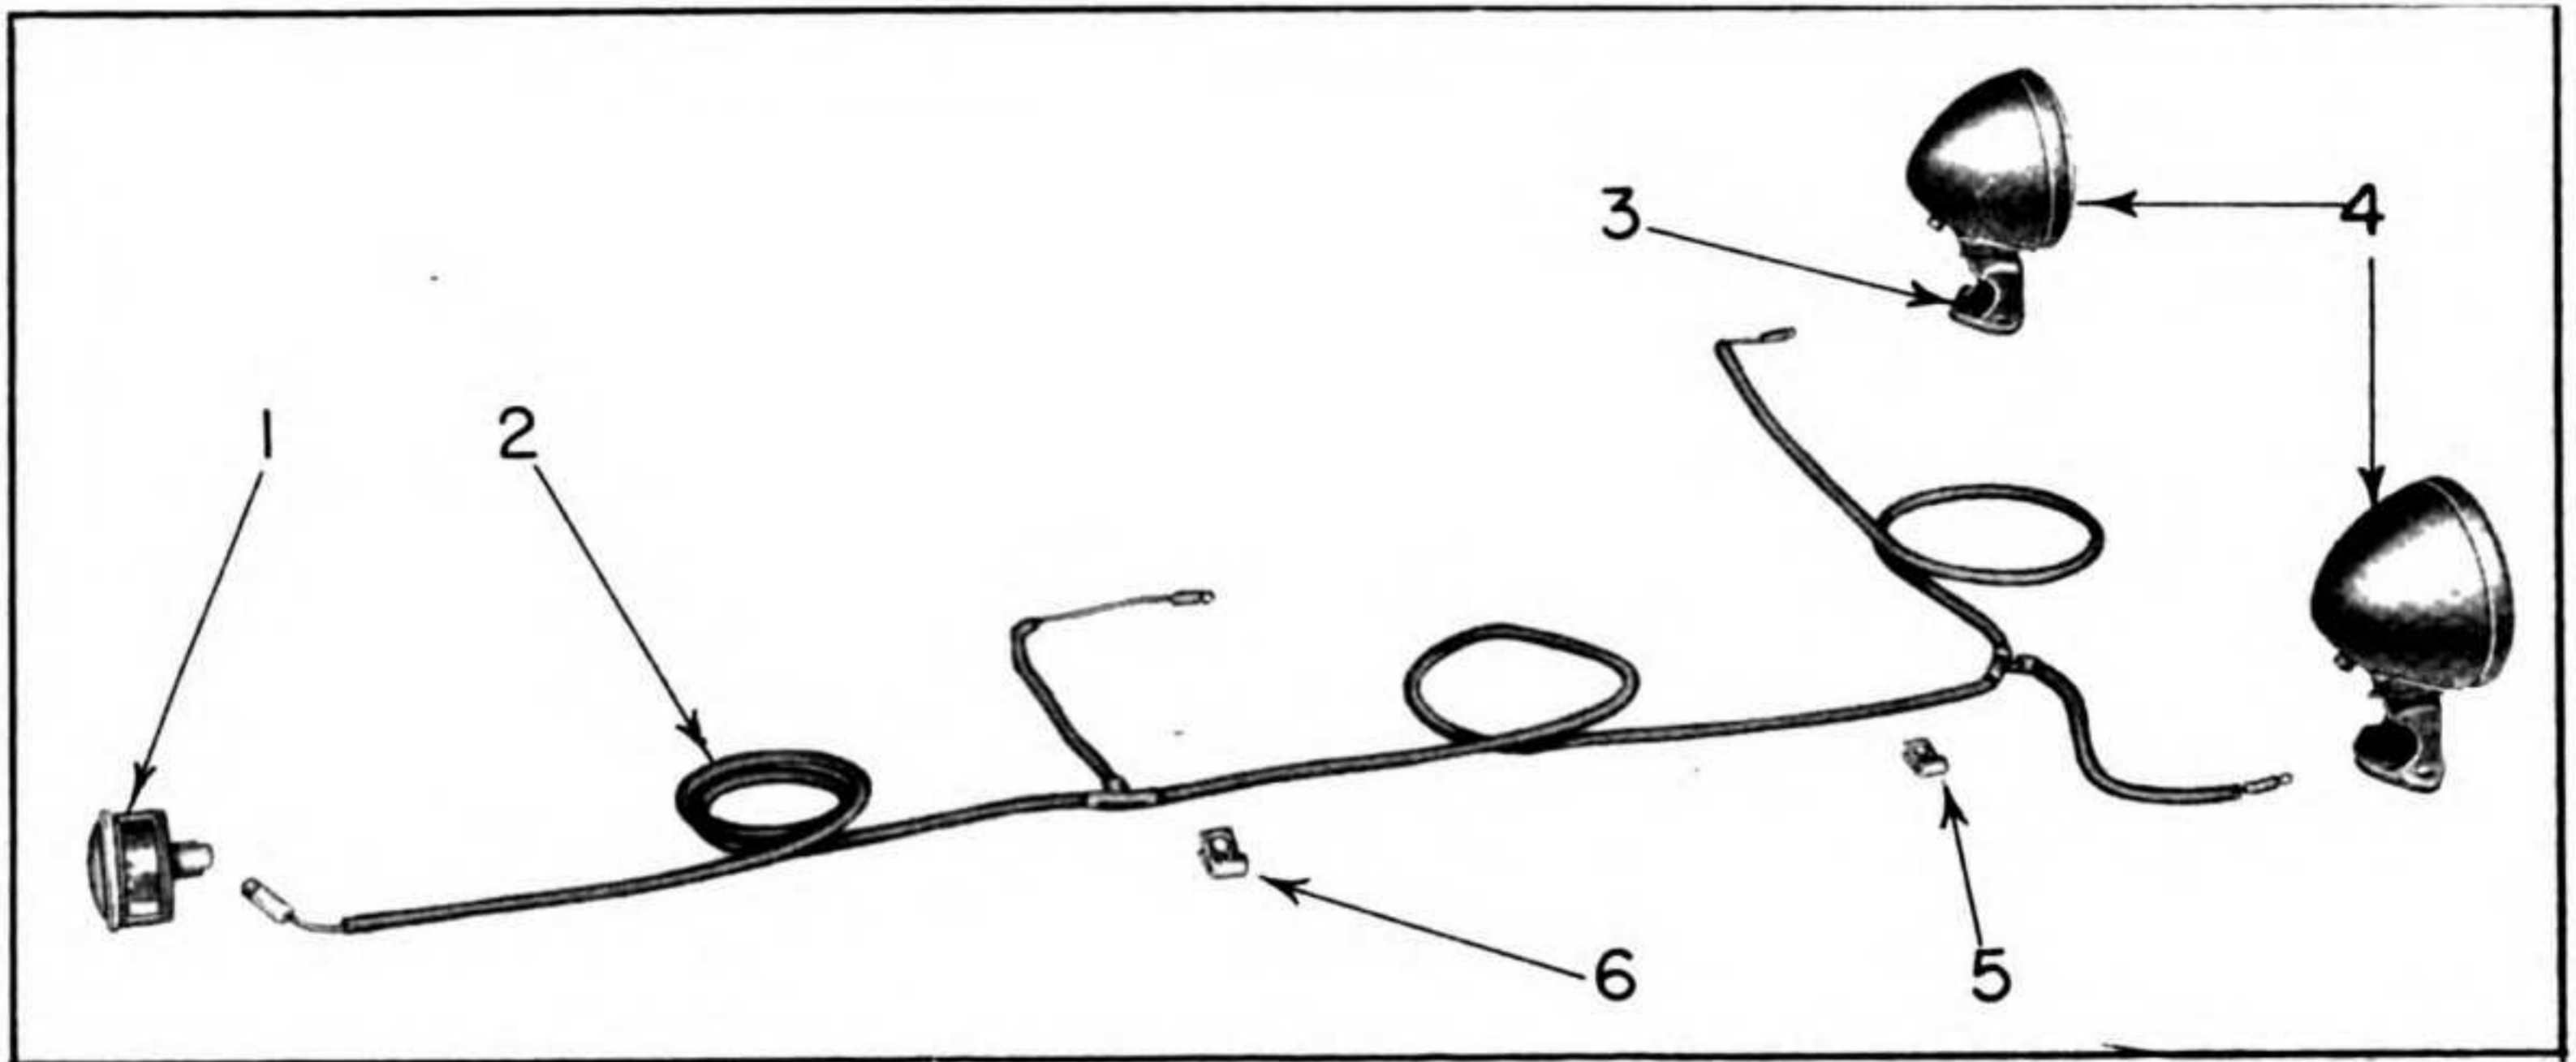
0606 LIGHTING EQUIPMENT
